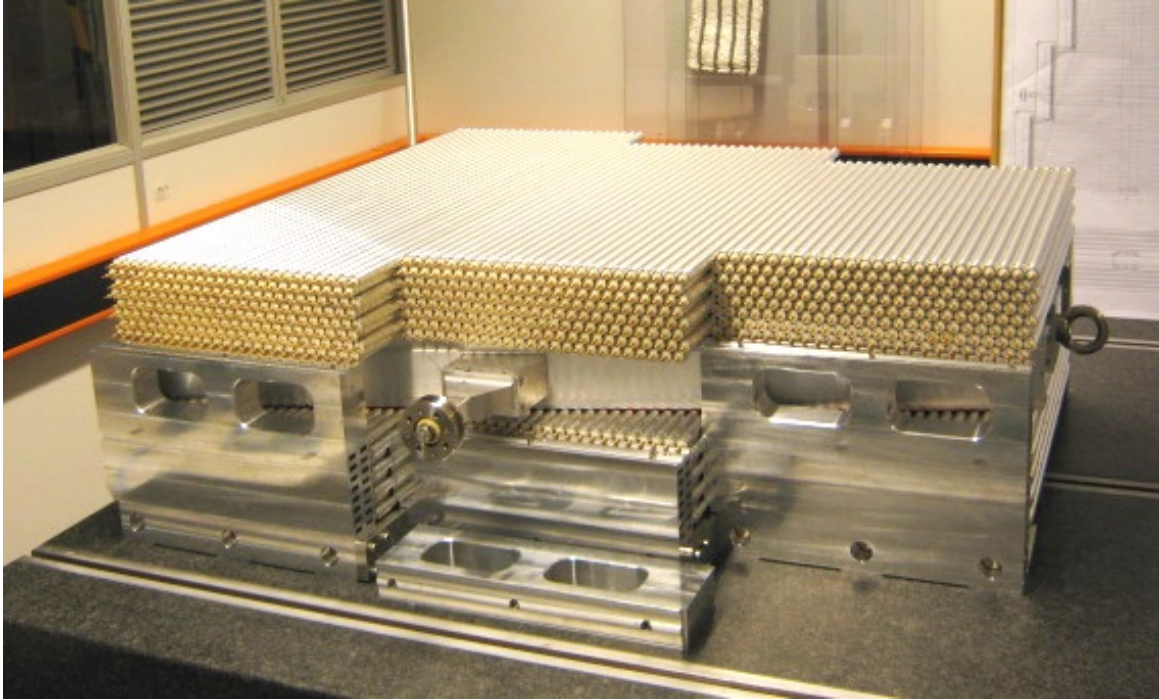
The small tube prototype chamber after assembly, consisting of two modules of 8 tube layers, 72 tubes per layer and 1152 tubes in total.
